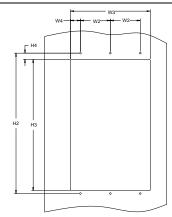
Flange installation diagram of VFDs of 460V 132–200kW Table C-3 Flange installation dimensions of 220V 0.75–55kW (unit: mm)
